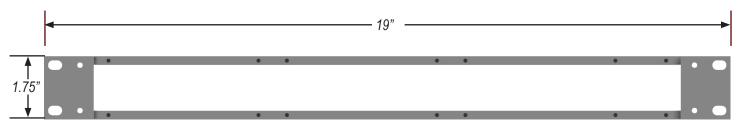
CEP-RK Rackmount Kit Dimensions
